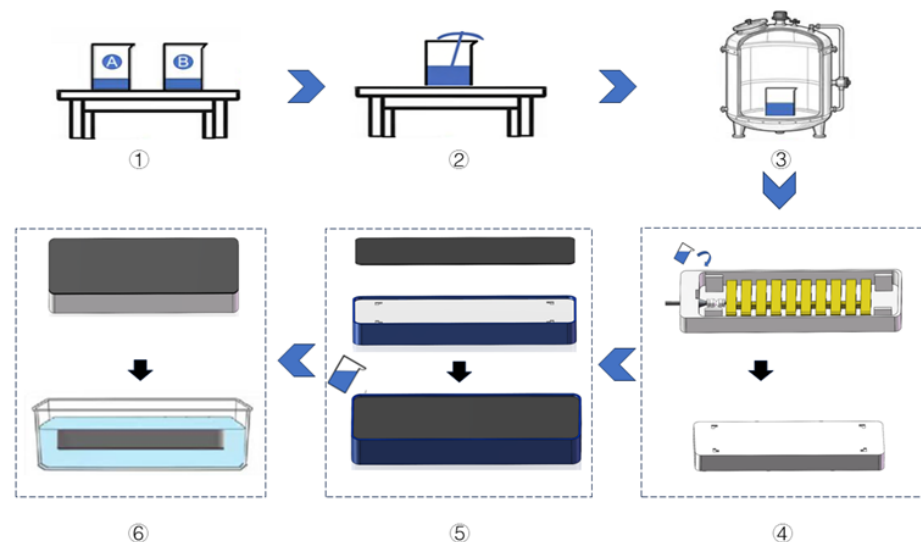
The proposed fabrication process: (1) silicone preparation; (2) mixing and stirring; (3) degassing in a vacuum chamber; (4) silicone pouring; (5) carbon fiber woven mesh assembly; (6) water bath and drying. A and B represent the silicone base and curing agent, respectively.
